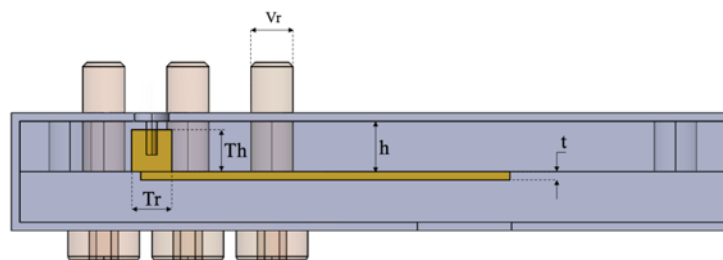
Lateral cut view of the antenna assembly with the heights and diameters of the components.
